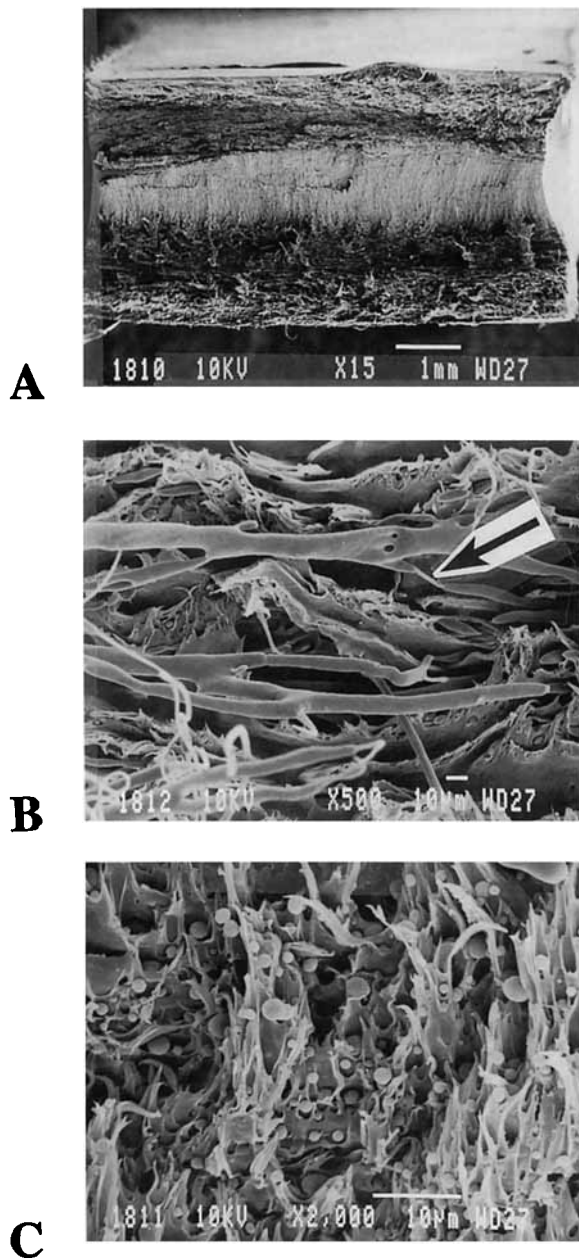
Micrographs of fracture surfaces of tested noncompatibilized type II specimens containing a weldline (position M). (A) whole cross-section; (B) skin; (C) core.
